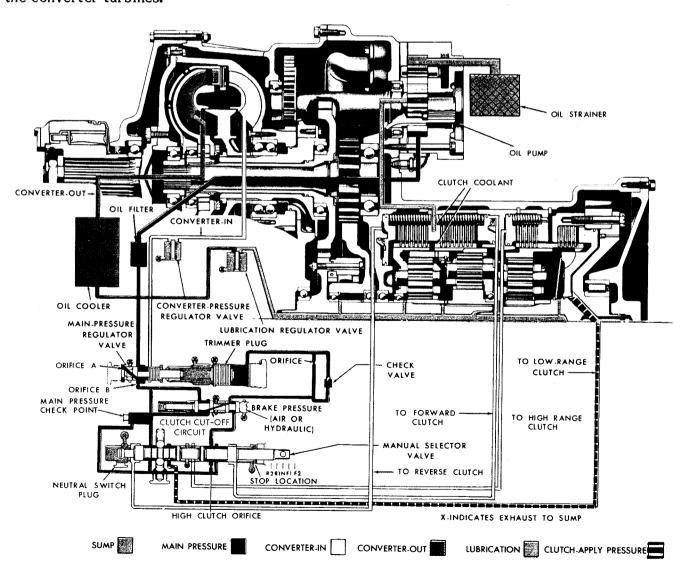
Hydraulic system with clutch cutoff valve--schematic
